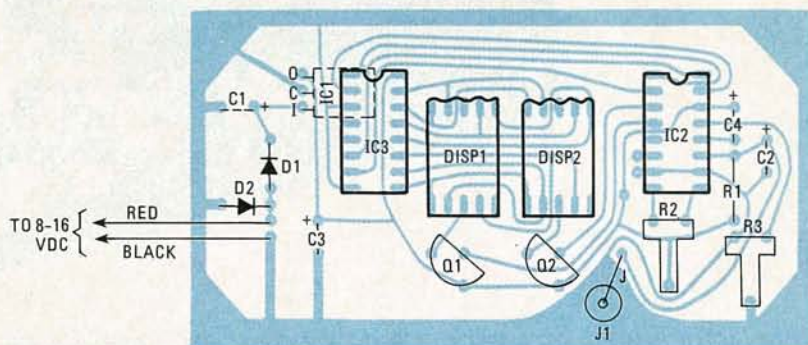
WHEN YOU INSTALL the LED's, solder only two corner pins at first. That will let you adjust their positions easily should they not be in straight.
